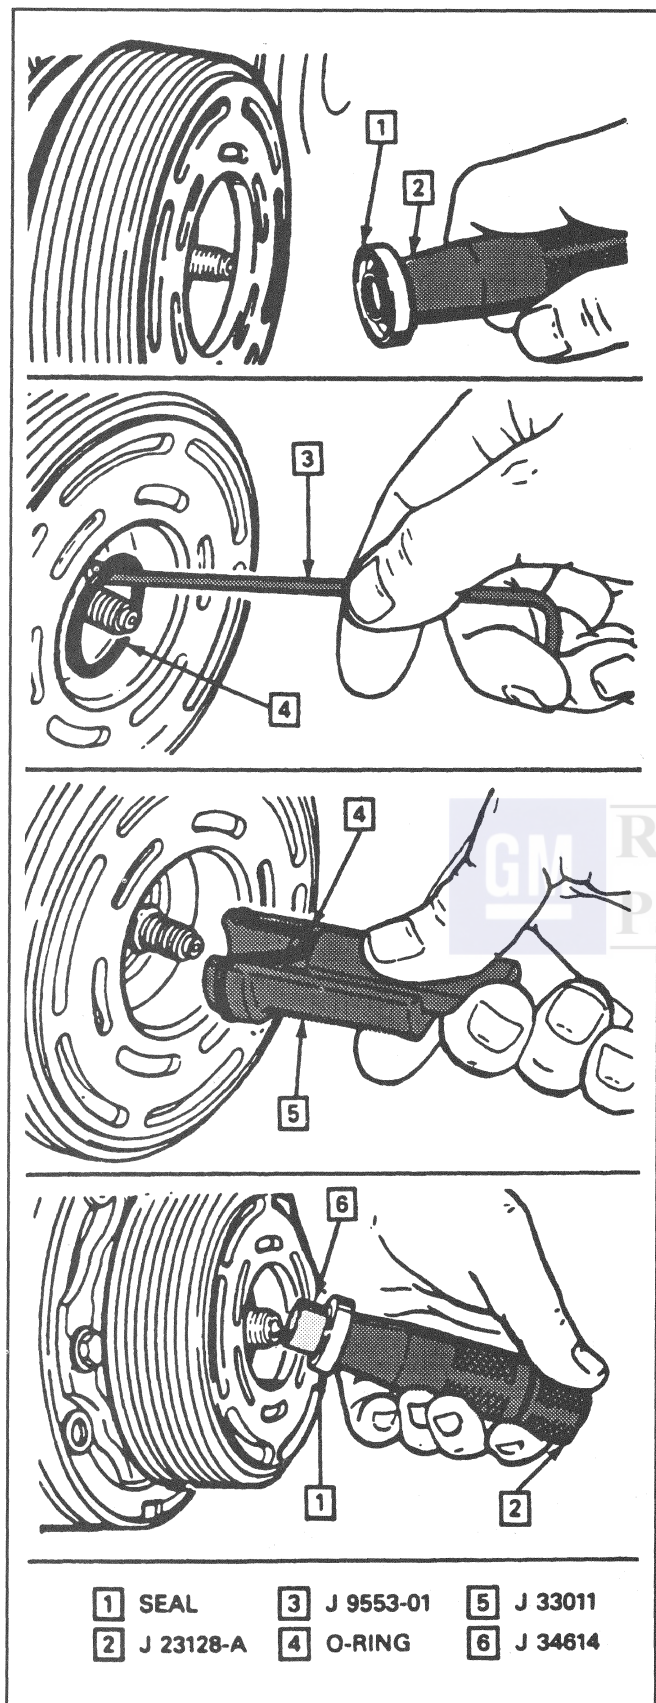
Removing and Installing Shaft Seal and O-Ring
